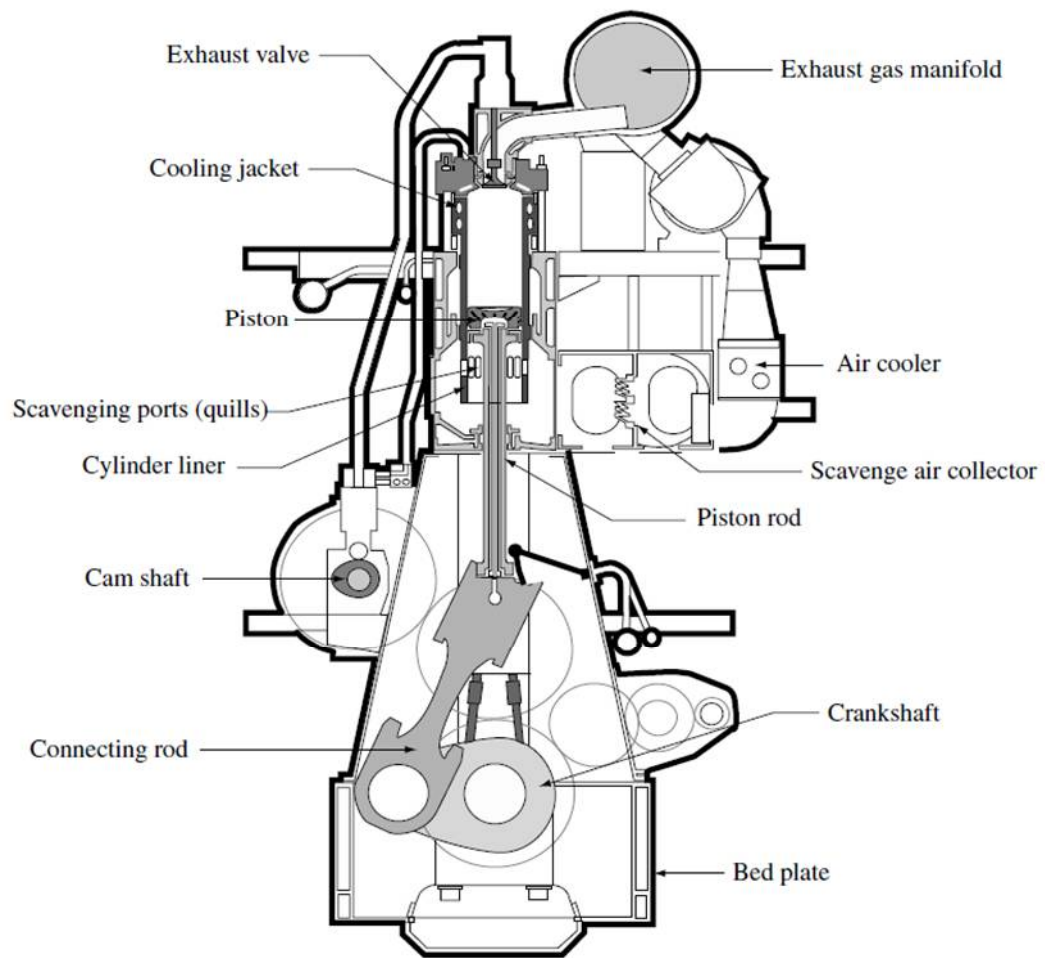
Cross-section drawing of low-speed 2-stroke crosshead marine engine
